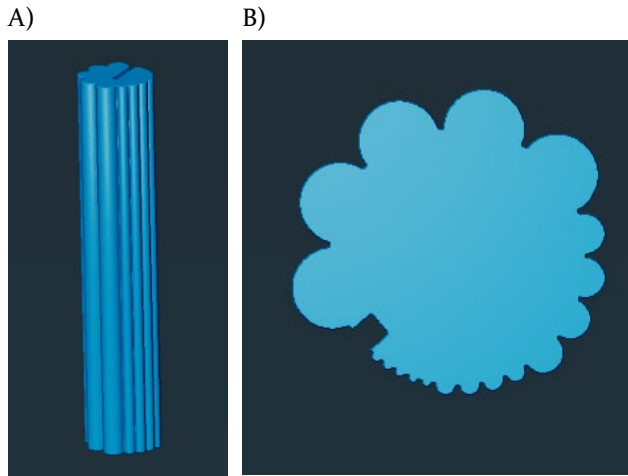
Example CAD cylinder design: A) side view of grooves and B) Top view of groove pattern.
